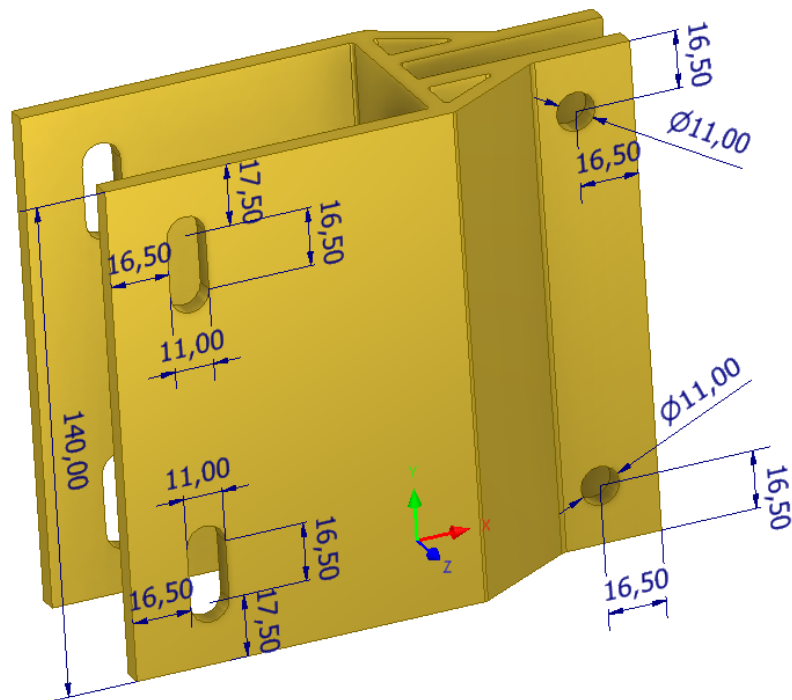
Bolt hole placement and extrusion length for large custom wind profile. All bolts size M10. Dimensions in mm.
